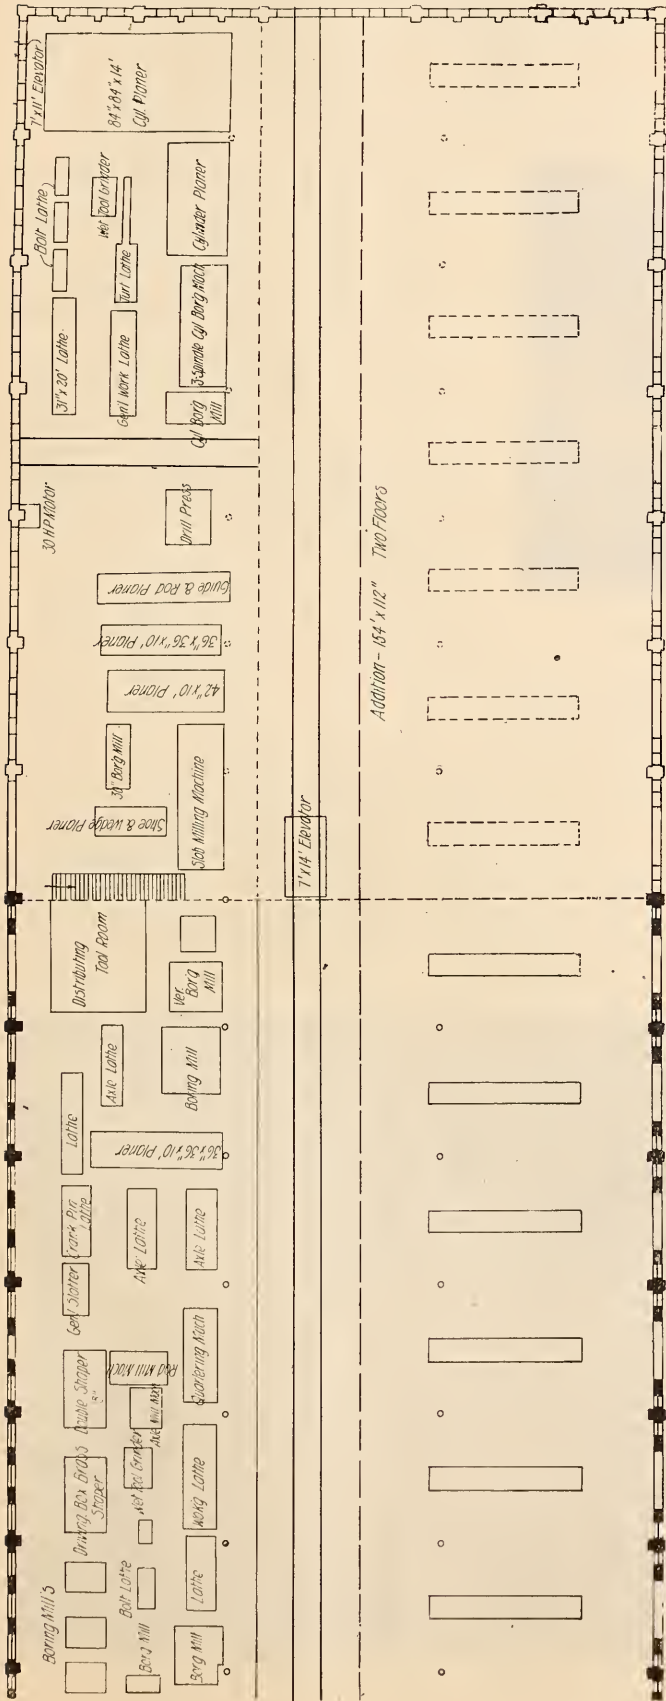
PLAN OF NEW SECTION OF MACHINE AND ERECTING SHOP, GROUND FLOOR, C., M. & ST. P. RY.
